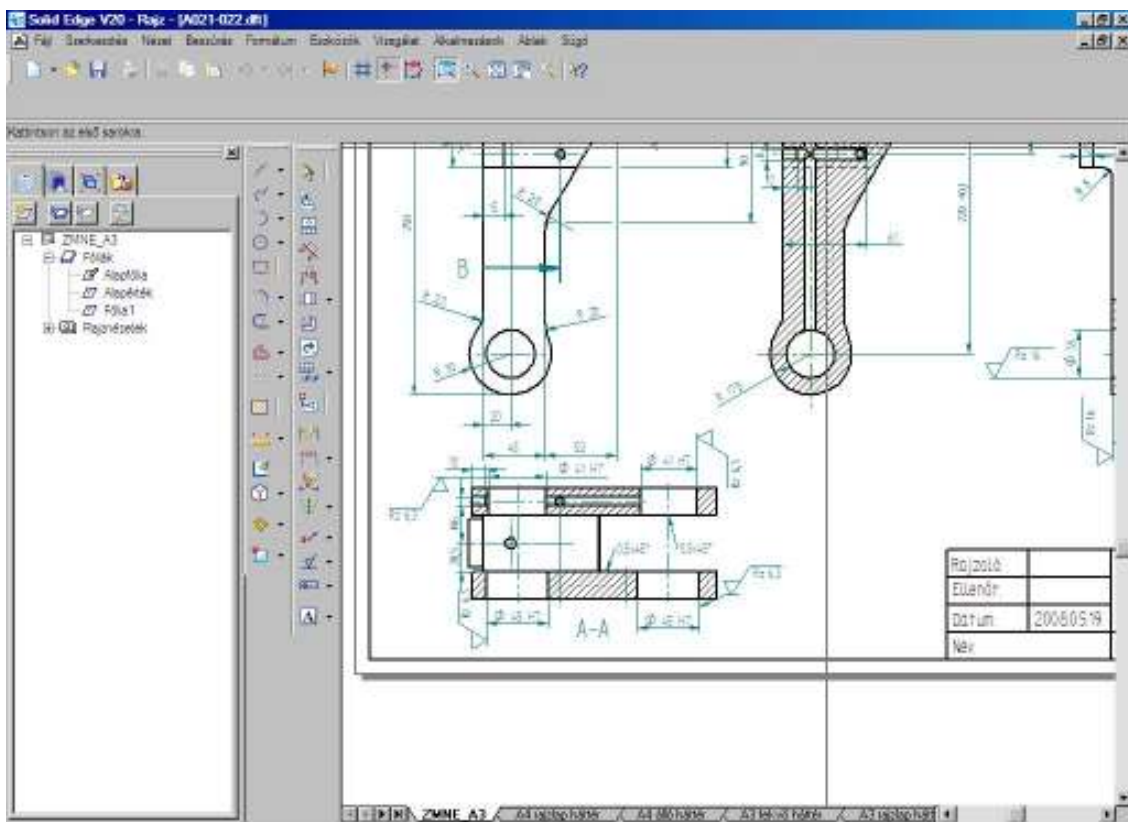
Creating a technical drawing by a couple of 'clicks'.
